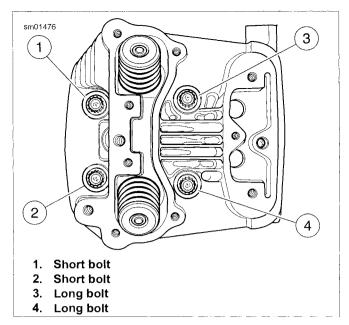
Front Cylinder Head Screw Loosening/Tightening Sequence (typical)
